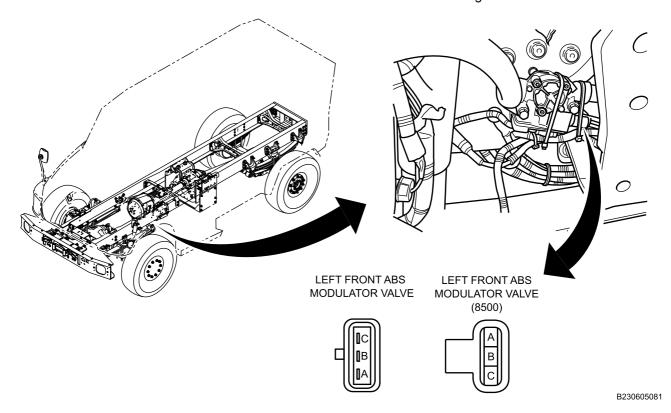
Outboard Left Front Frame Rail, Inboard of Left Front Wheel.
